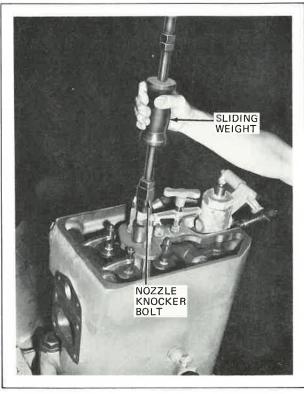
KNOCKER USED TO REMOVE INJECTOR FROM CYLINDER.
